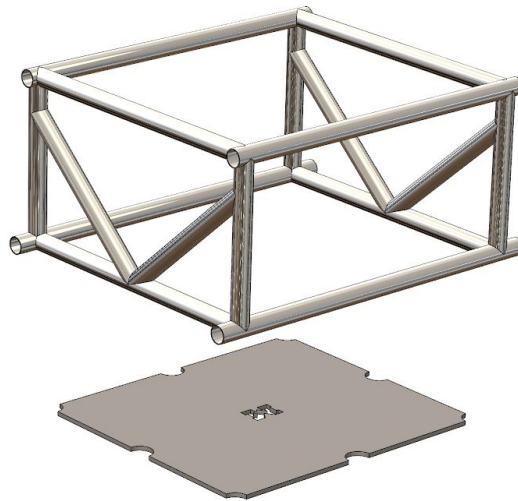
Final chassis structure with base plate which is welded within the bottom frame rails.
